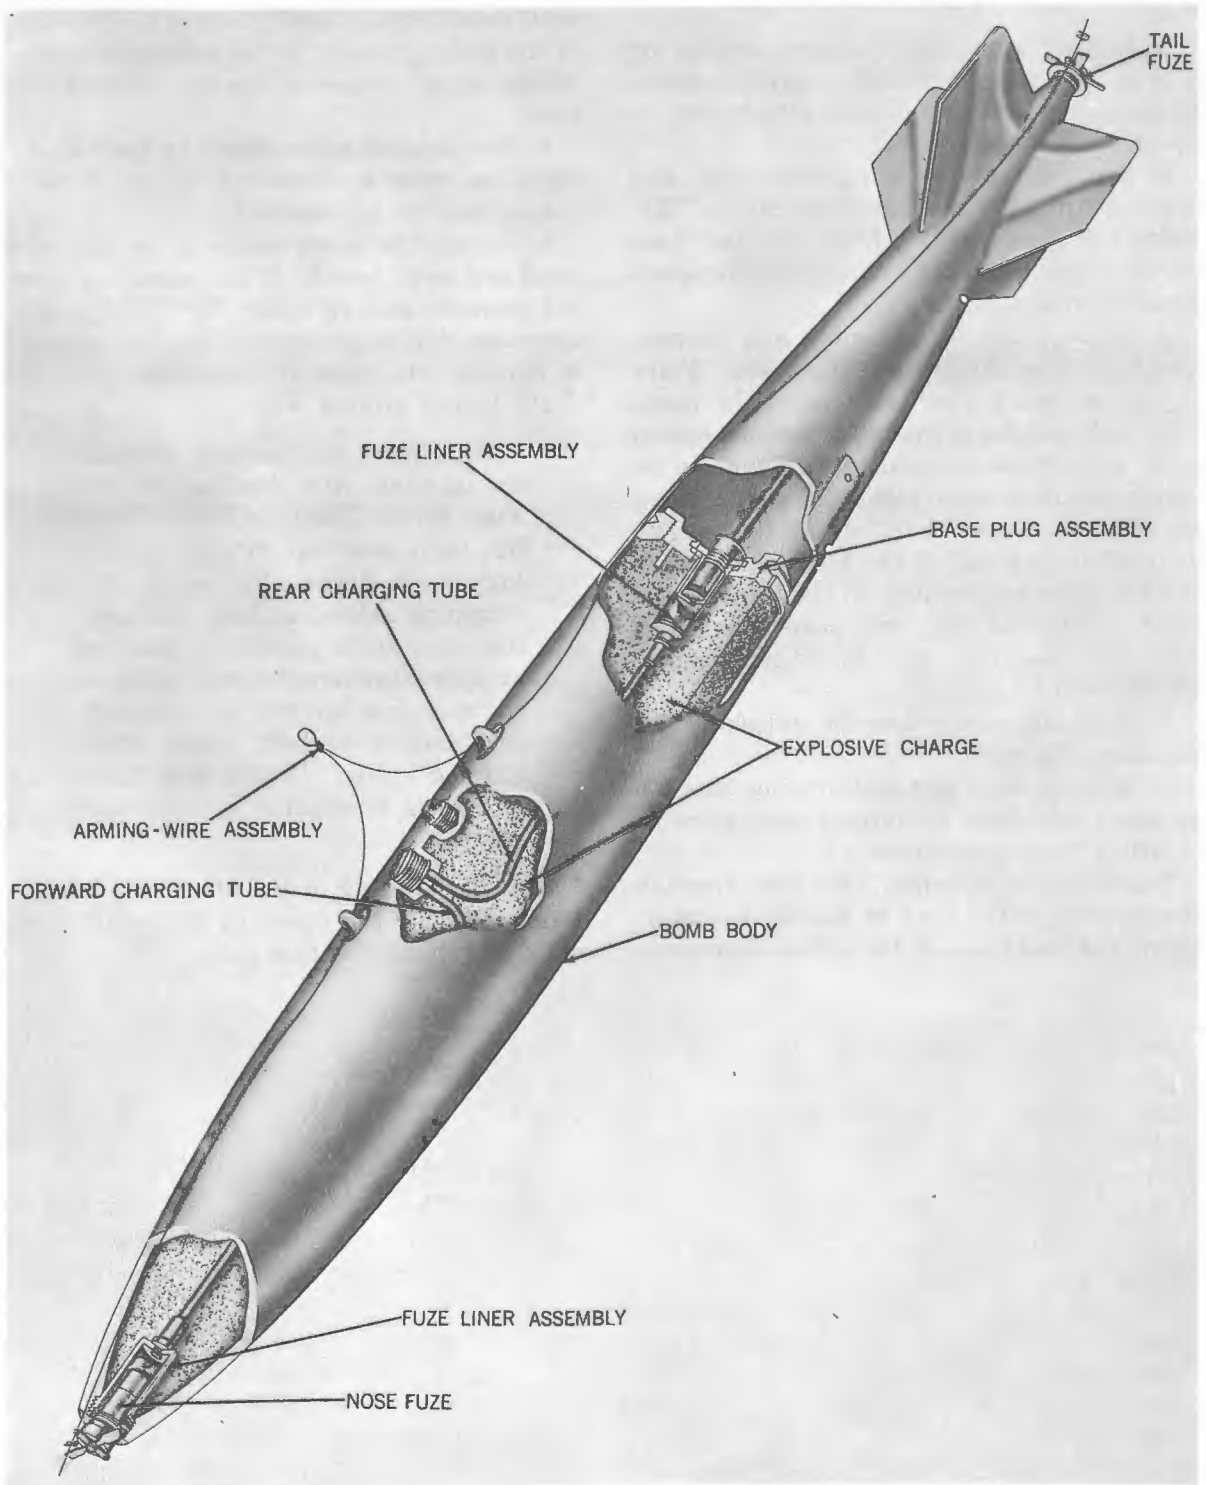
1000-lb Low-Drag Bomb (GP) Mk 83 Mod 3 (Mechanically Fuzed), Cutaway View.
